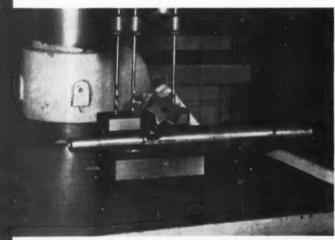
(Above) Cross-drilling a motor shaft with a fixed-ledge type drill jig using a swing-clamp arrangement for locking.
